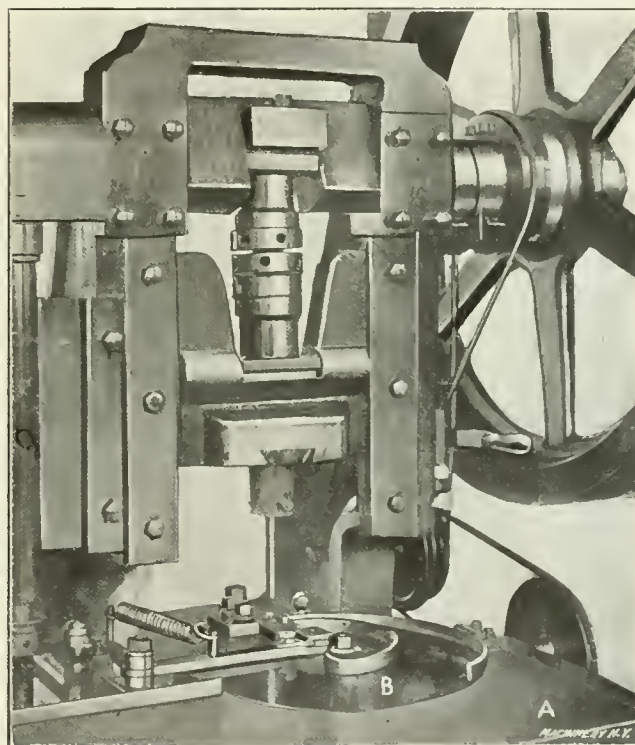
Friction-dial Drawing Press for Drawing the Cups
